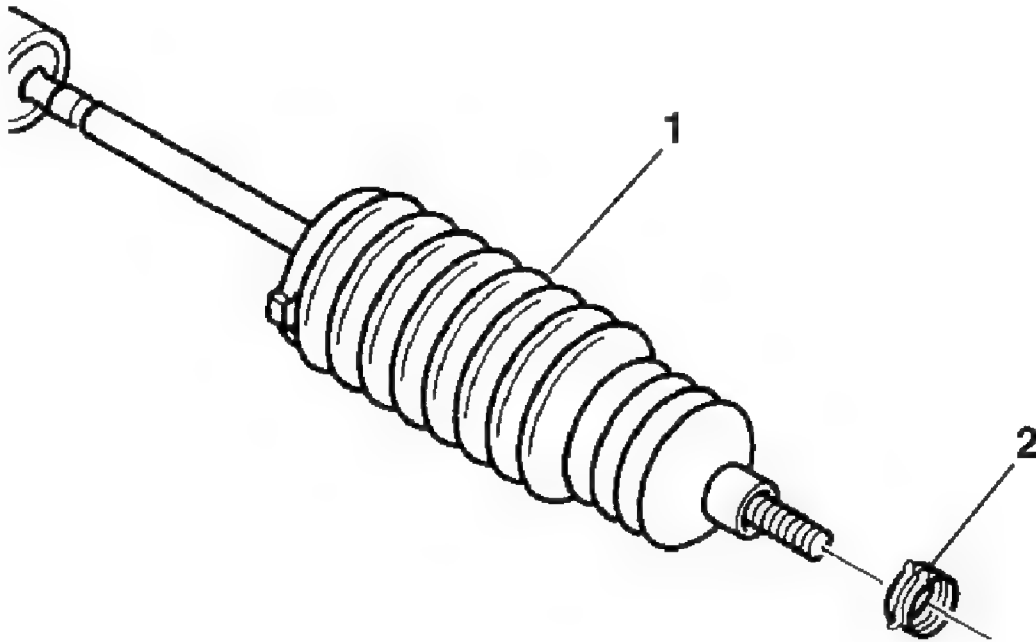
Removing/Installing Tie Rod End Clamp At Rack & Pinion Boot
